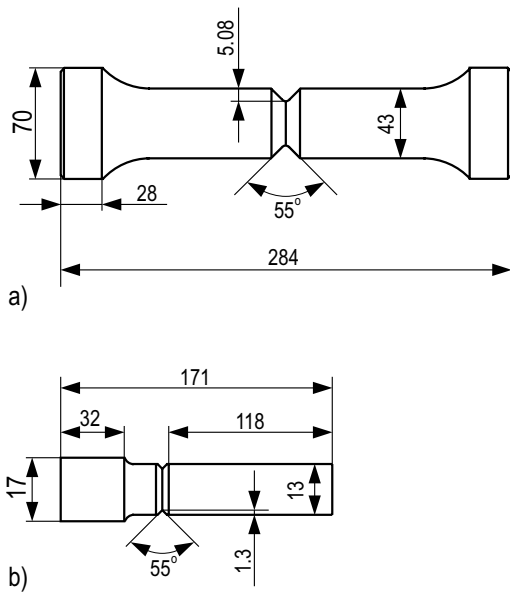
Cylindrical fatigue test specimens subjected to (a) fully reversed tension-compression and (b) rotating bending [1, 16].
